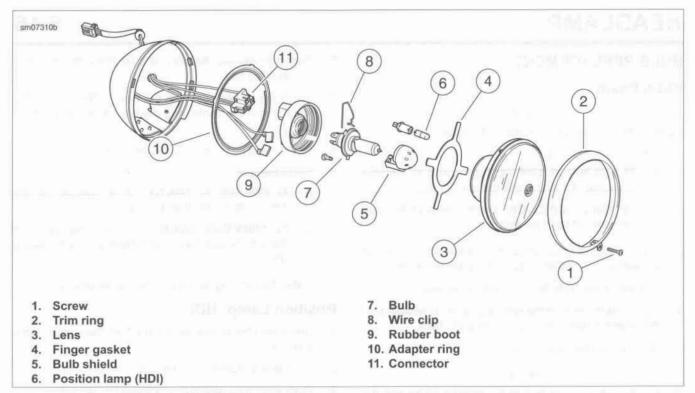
Headlamp Assembly: XL 1200V/C/CP/CA/CB
